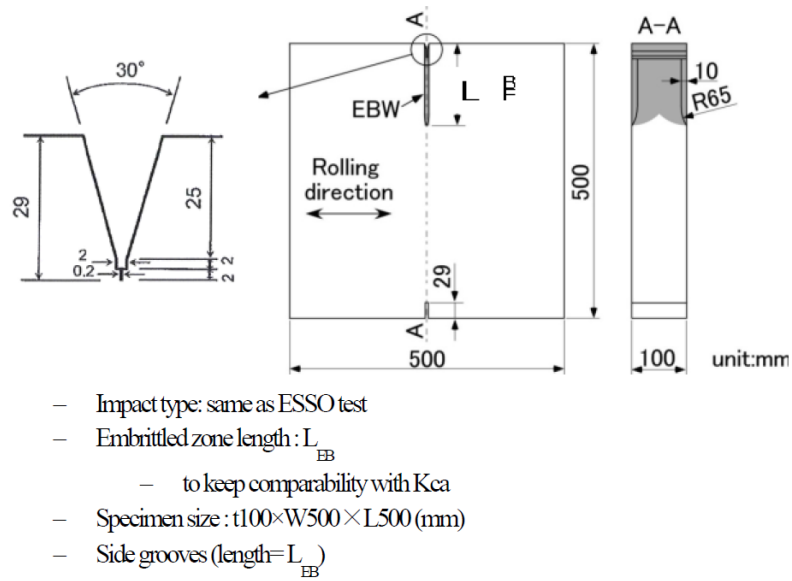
Crack arrest temperature specimen (embrittle welding) [72]
